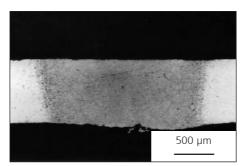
Welding of aluminum thin sheet with very smooth seam
